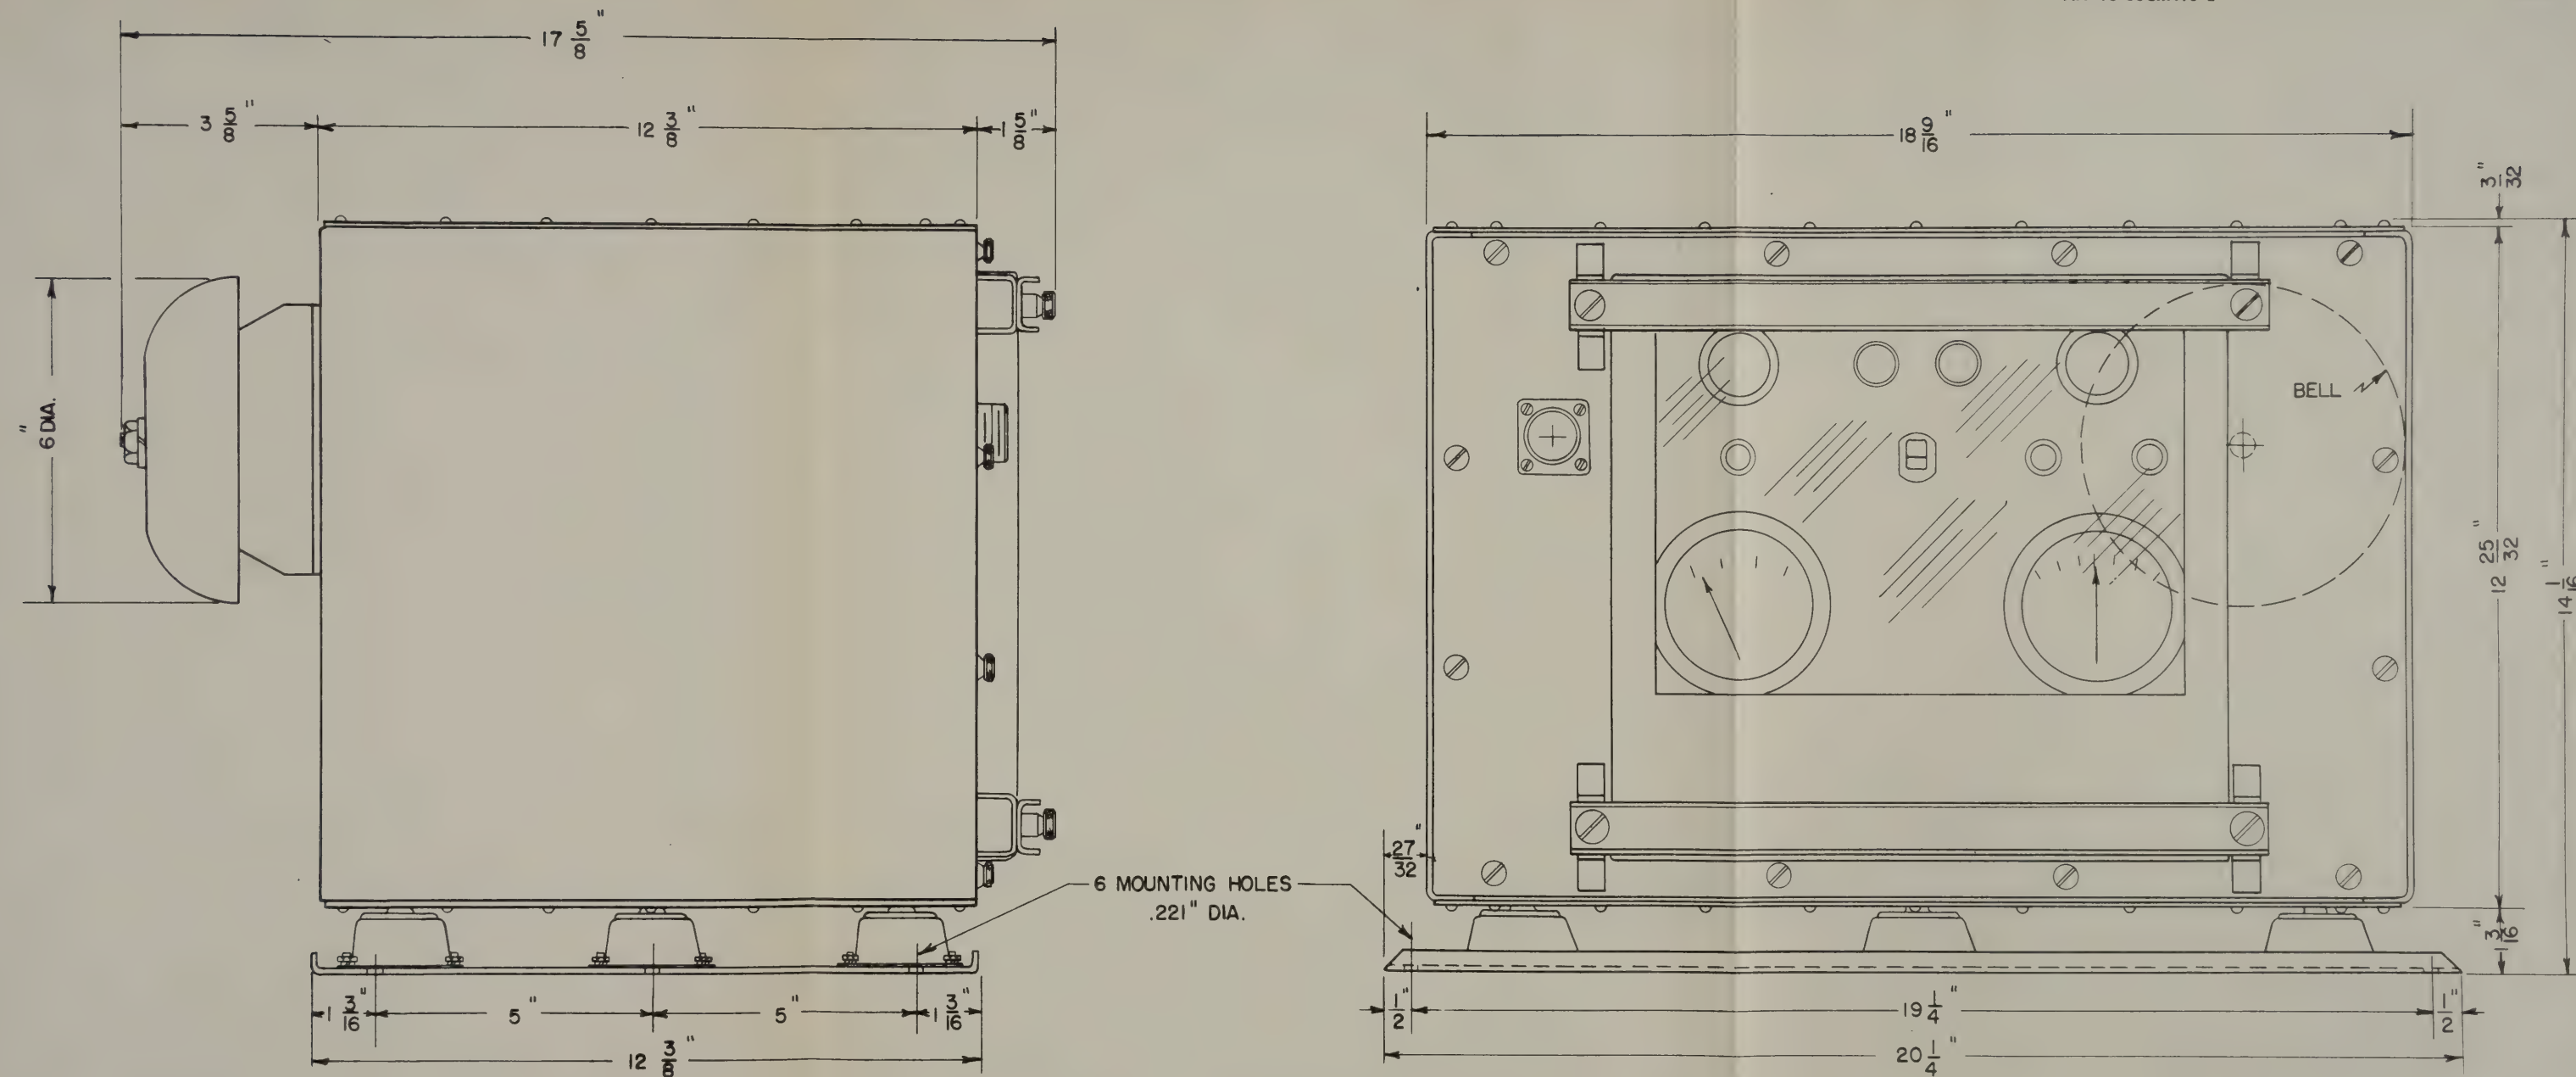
Indicator ID-70/CRN-10 or ID-70A/CRN-10—Outline Dimensions
